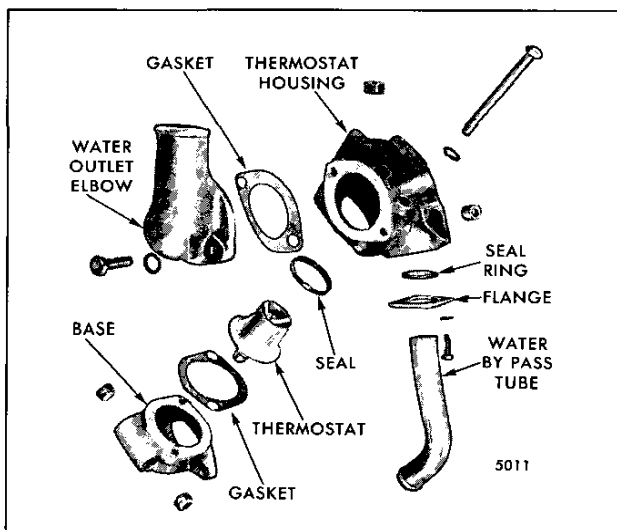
Thermostat Housing Details and Relative Location of Parts (V-Type Engine)
